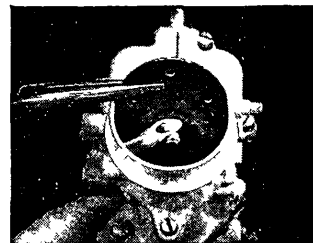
Install choke valve. Center valve by tapping lightly before tightening screws
